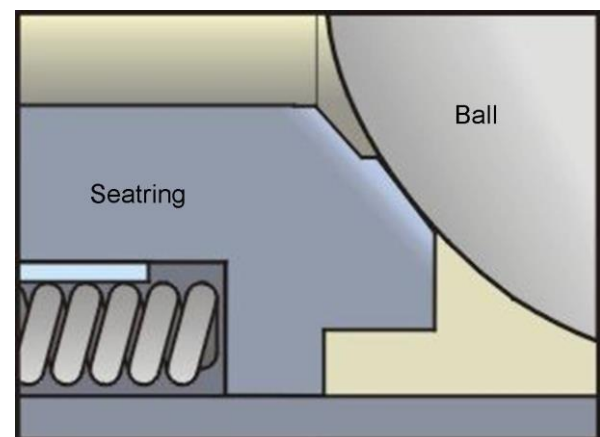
Ball-Seating Design metal-to-metal Ball Valve
